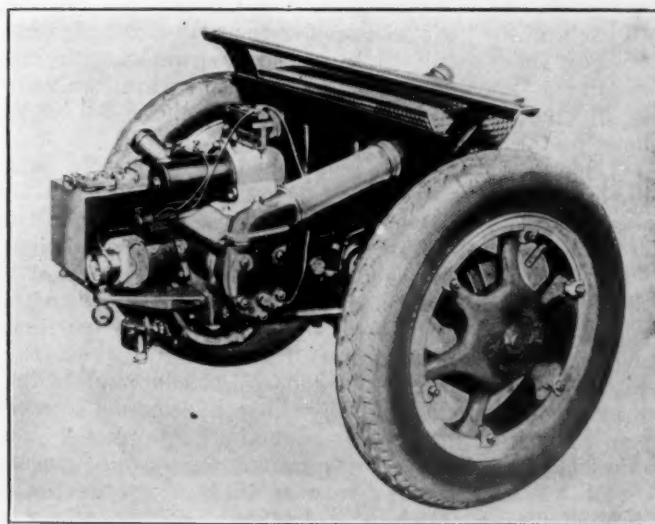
INTERCHANGEABLE POWERPLANT AND REAR-END ASSEMBLY
